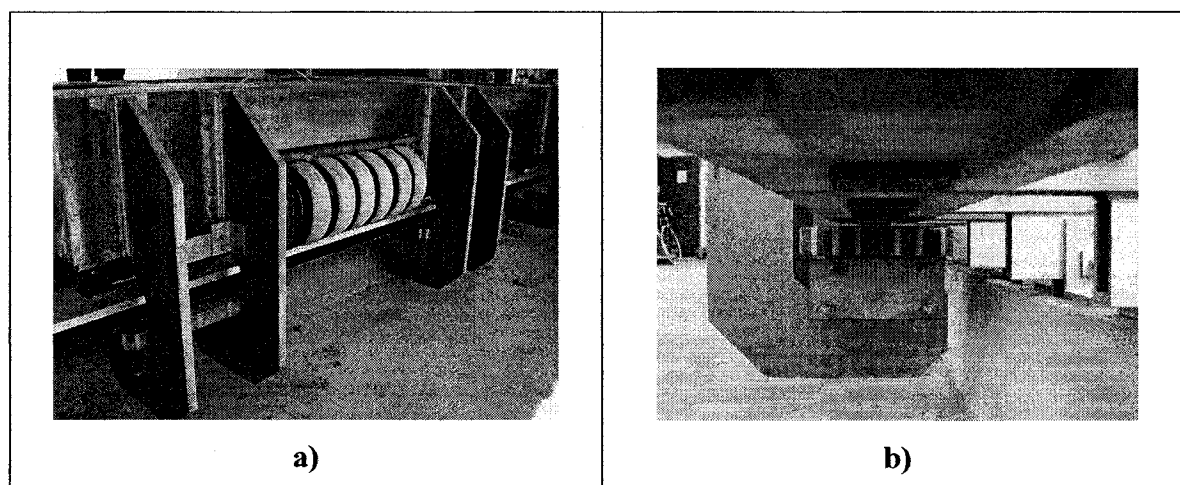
Electromagnets mount a) LIM magnet, b) Coil assembly to the hockey stick
